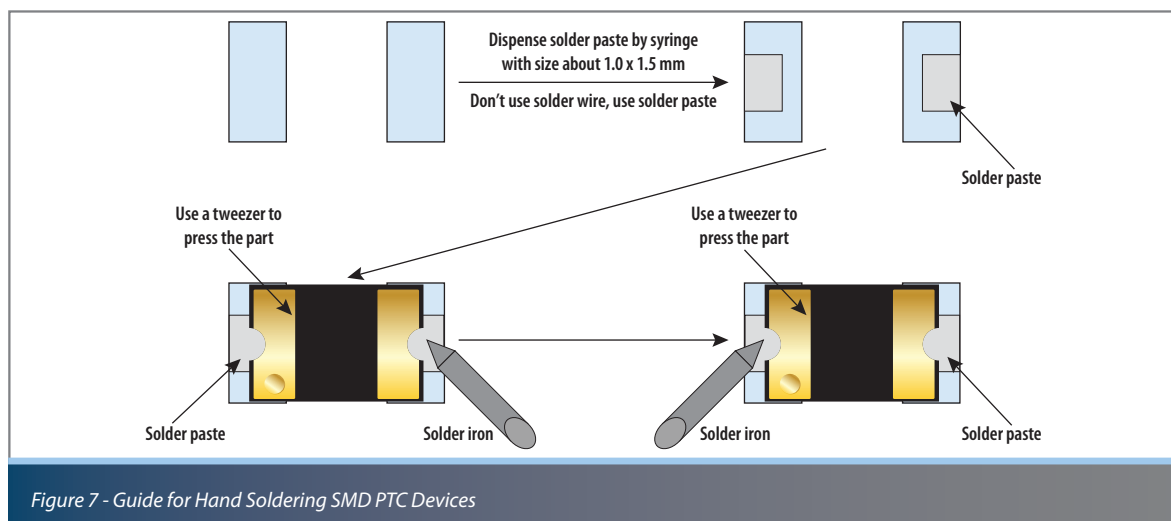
Guide for Hand Soldering SMD PTC Devices
